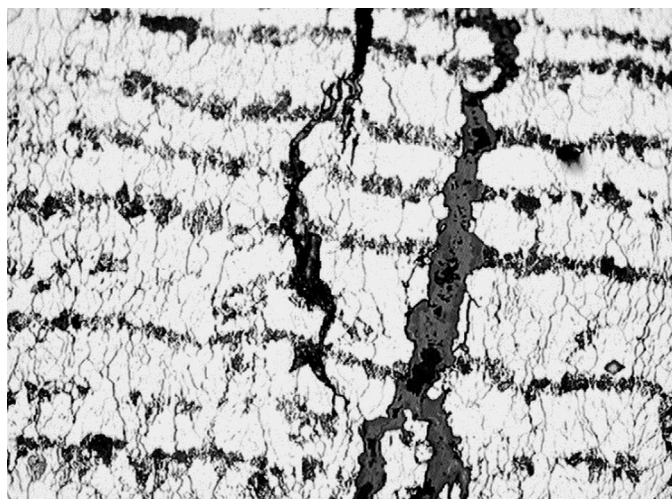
Crack in the bend material in the vicinity of the C1 welded joint. Approx. 500x magnification, nital etching
